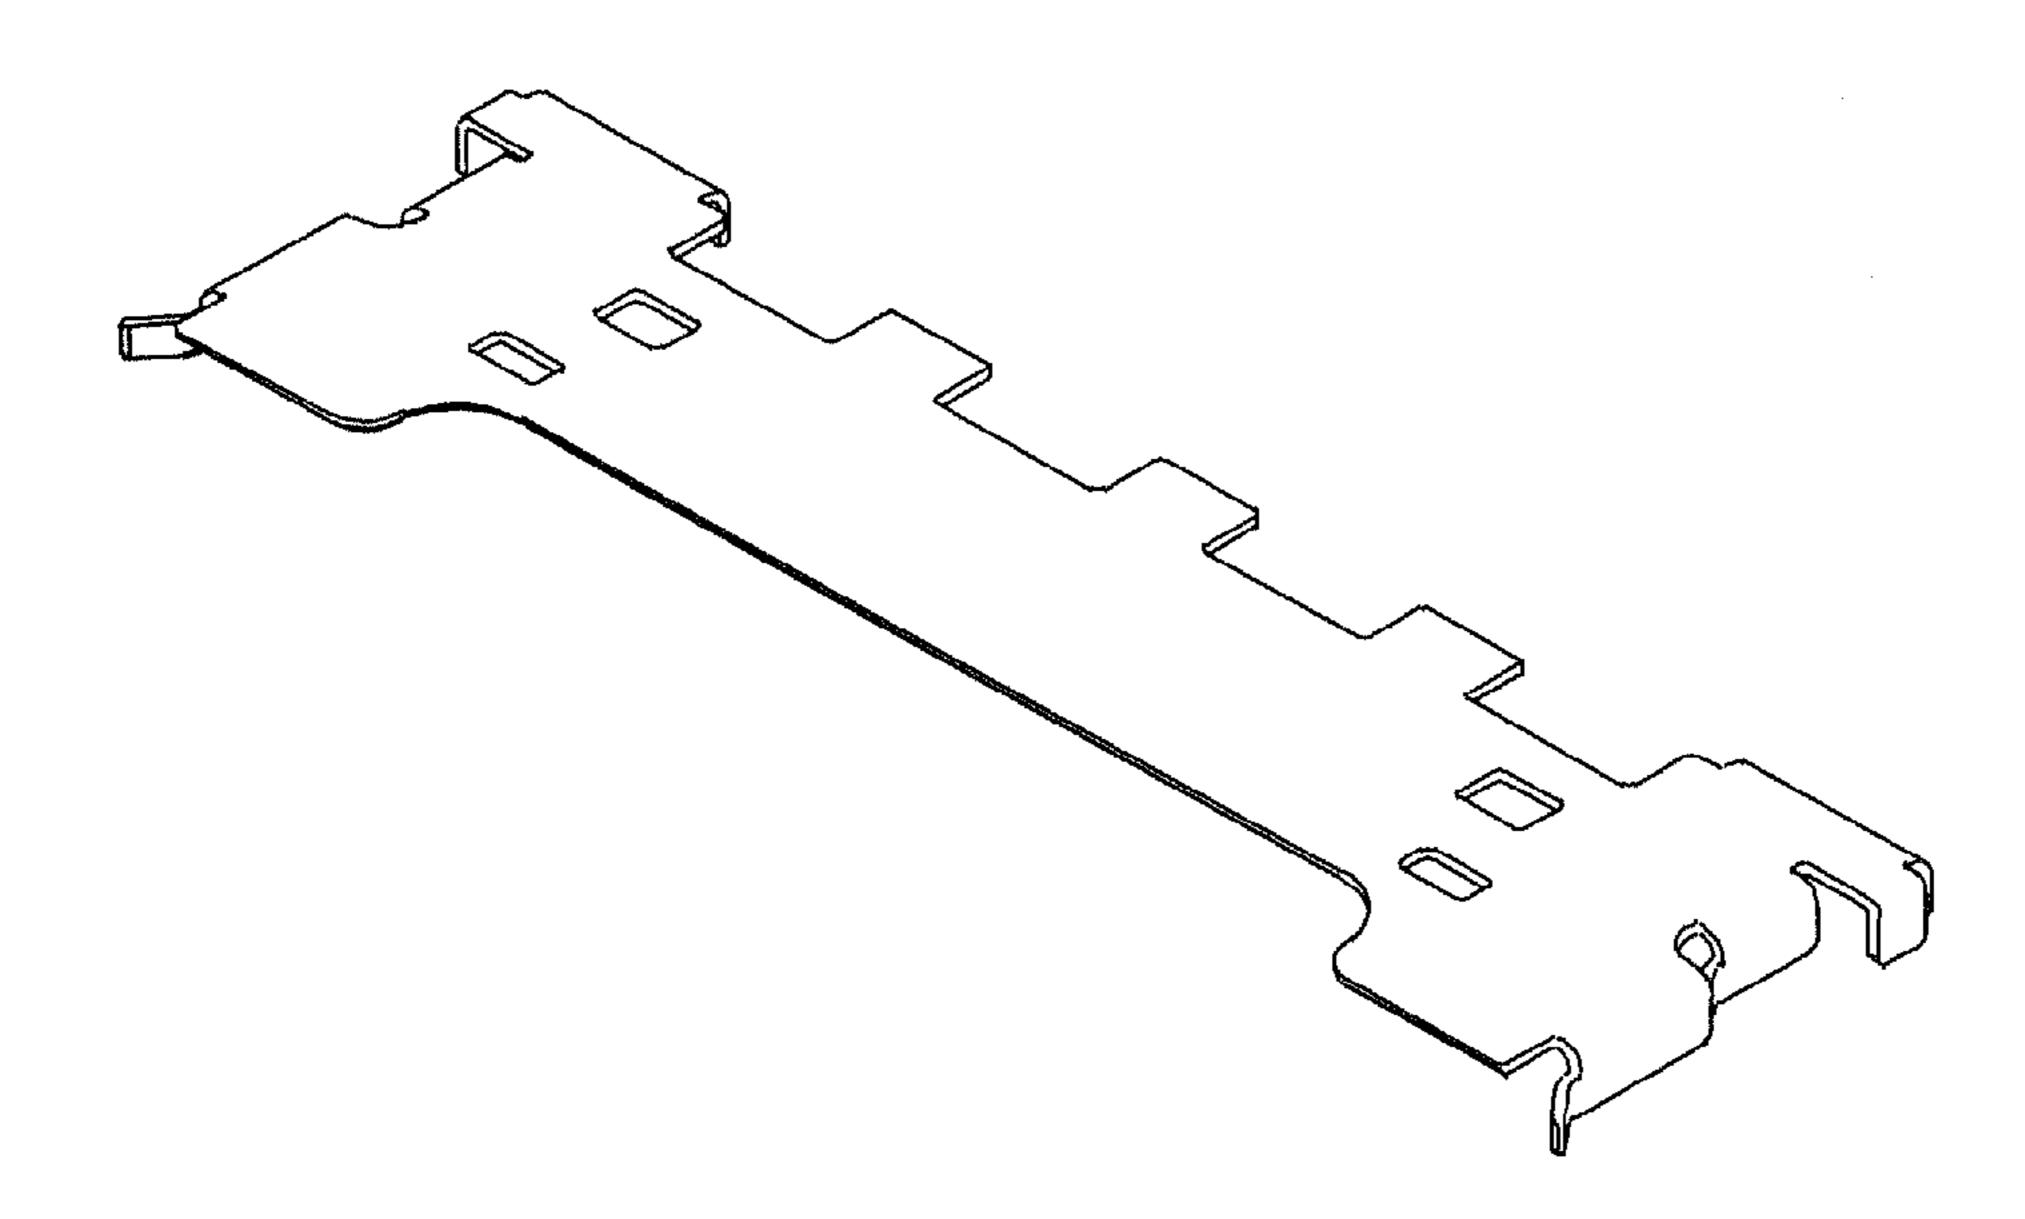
is a front, bottom and right side perspective view of the alignment cover; and,
